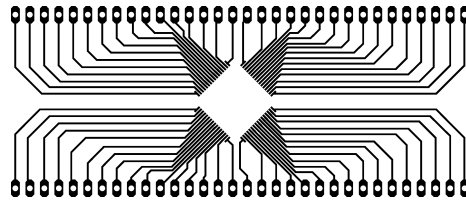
PCB layout for QFP64 to DIP64 adapter.
